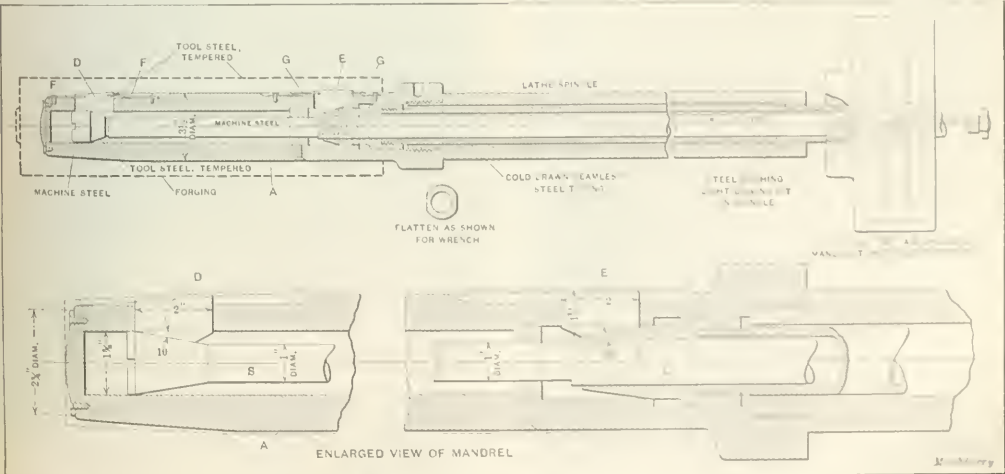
Air-operated Mandrel used in holding Shell Forgings when centering and turning
